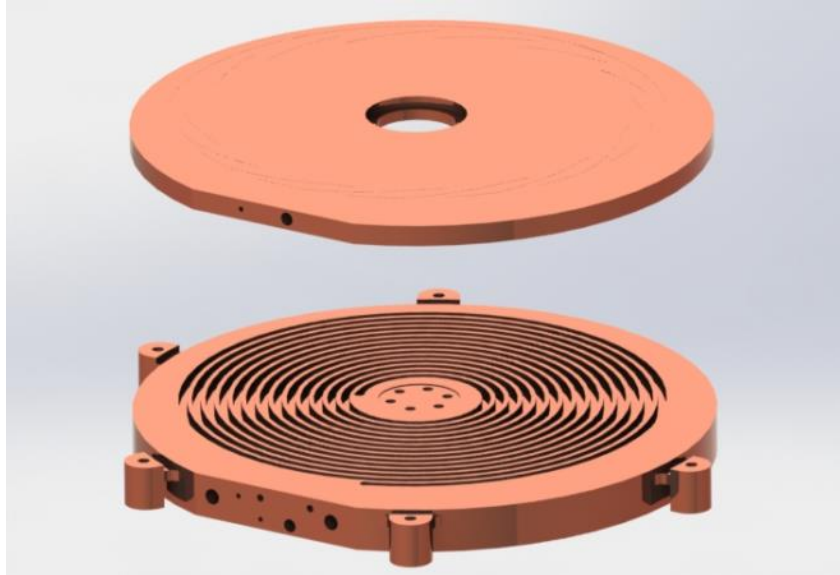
Components of the baseplate: the main plate and lid. All channel features are machined into the main plate. The machined channel is closed by brazing the main plate and lid together
